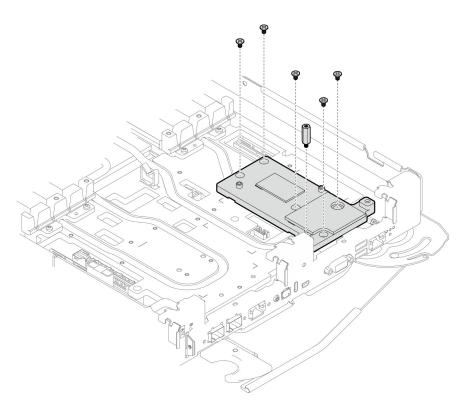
Removing ConnectX-7 NDR 200 riser assembly interface plate
